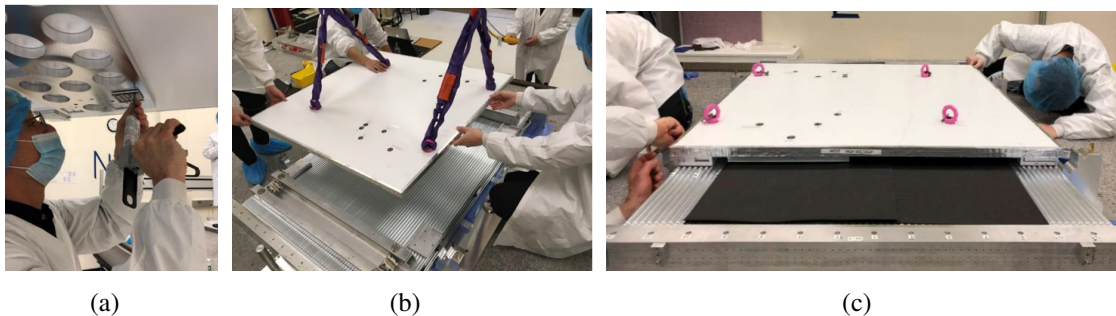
(a) Glue being applied to B-field and CCC-plates on the assembly plate; (b) assembly plate being placed on the AP-plates; (c) check of the assembly plate alignment with the AP-plates on chamber.
